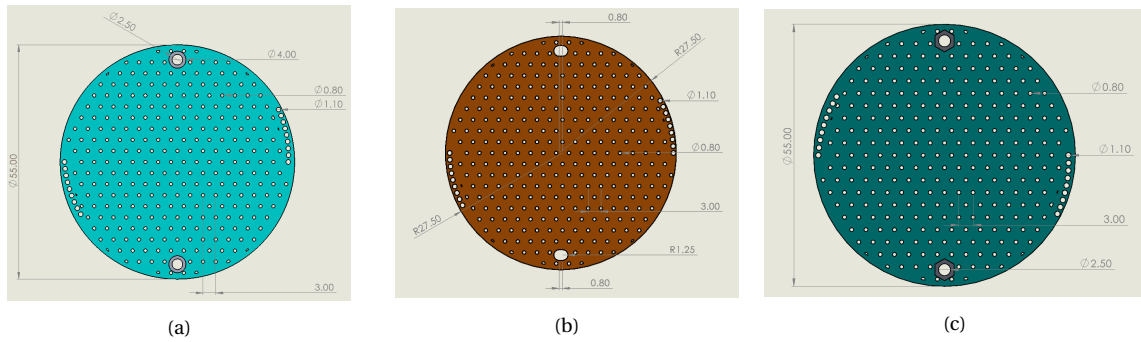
3-D printed Perforated disks for $l_h = 3$ mm hole spacing; (a): Top disk; (b) Middle disk; and (c) Bottom disk (all dimensions are in mm)
